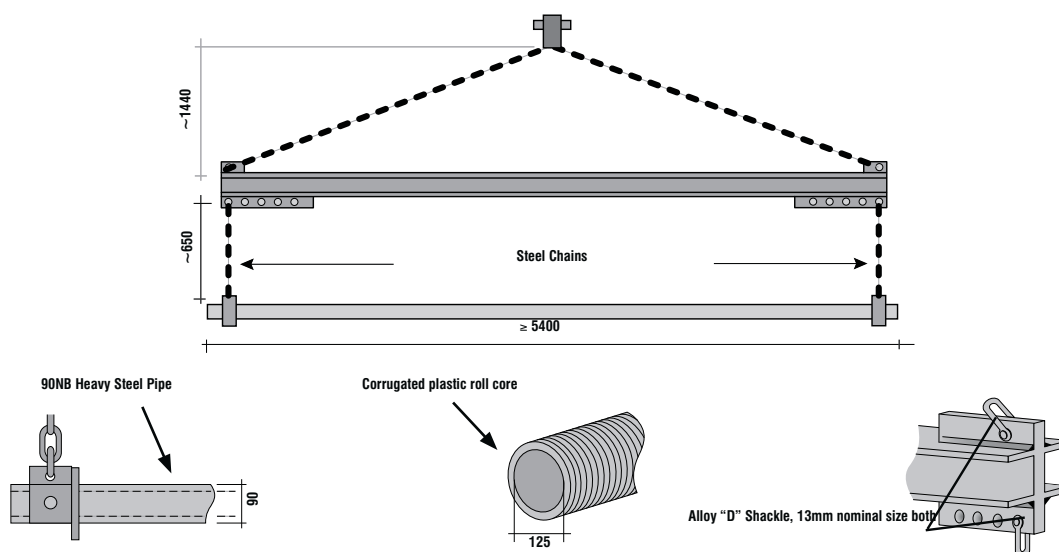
Spreader Bar Assembly - 1000 kg safe working load (Structural Engineer shop drawings provided upon request)
